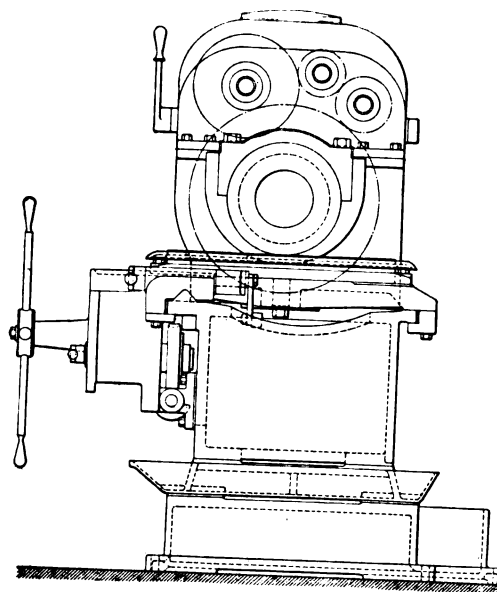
END ELEVATION OF 6-IN. SHELL LATHE
